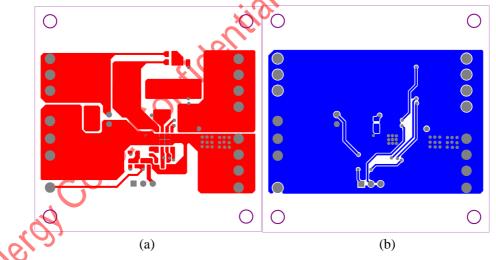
PCB Layout Plots: (a) Top layer, (b) Bottom layer
